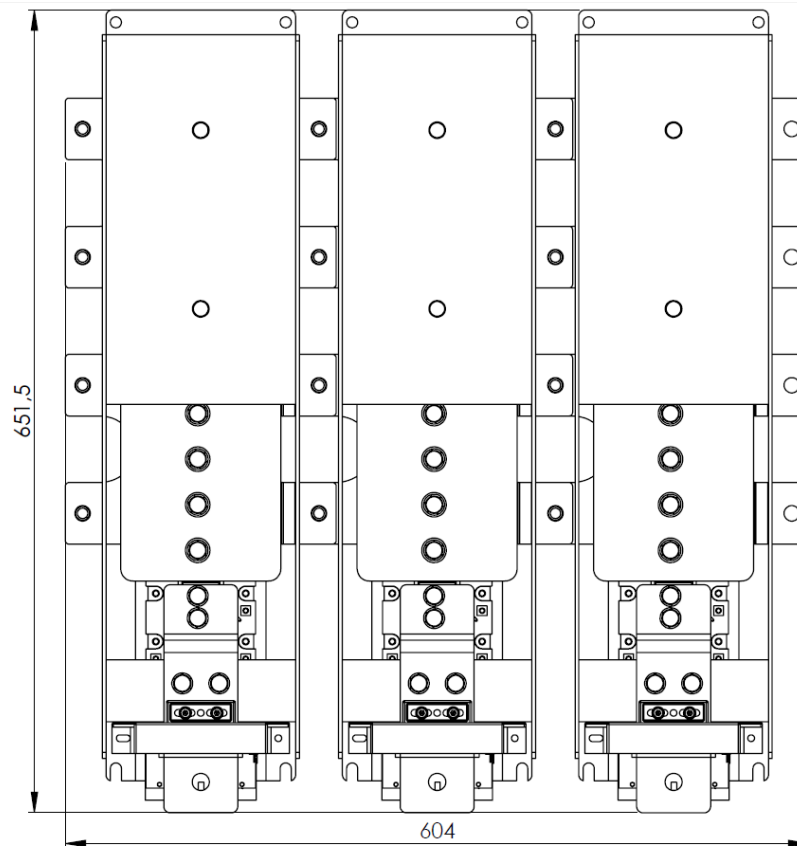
Mechanical drawing of 3 x VARIS™-14-17 three phase configuration
